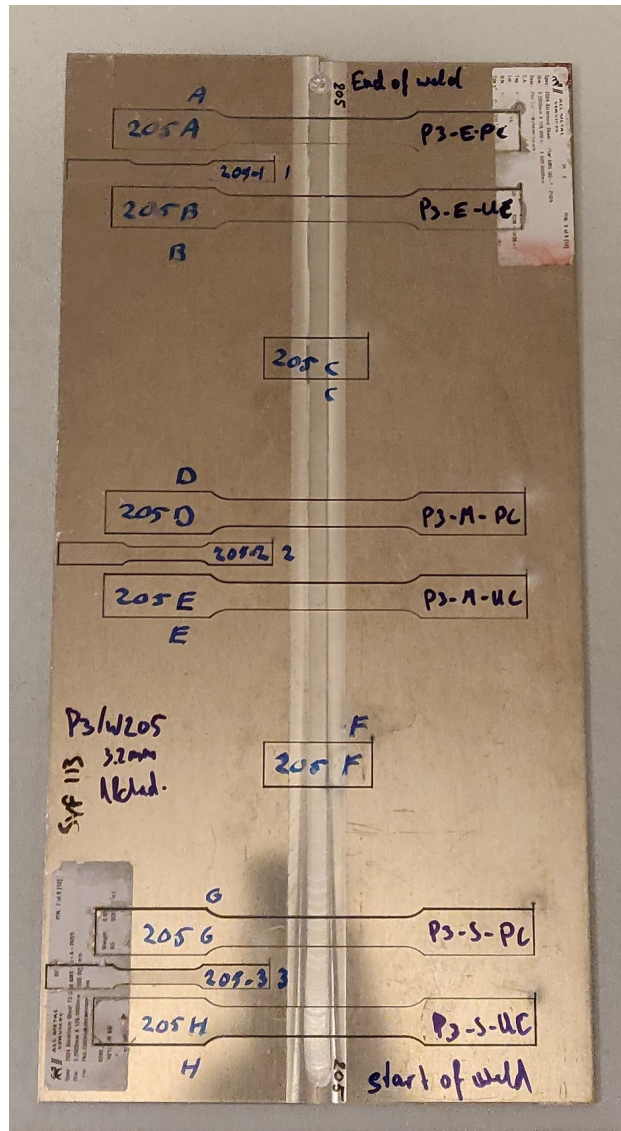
Representative overview of specimens as cut from the welded 3.2 mm Alclad sheet, showing 6 sheet-type tensile specimens, with 3 subsize tensile specimens and 2 rectangular specimens in between them.
